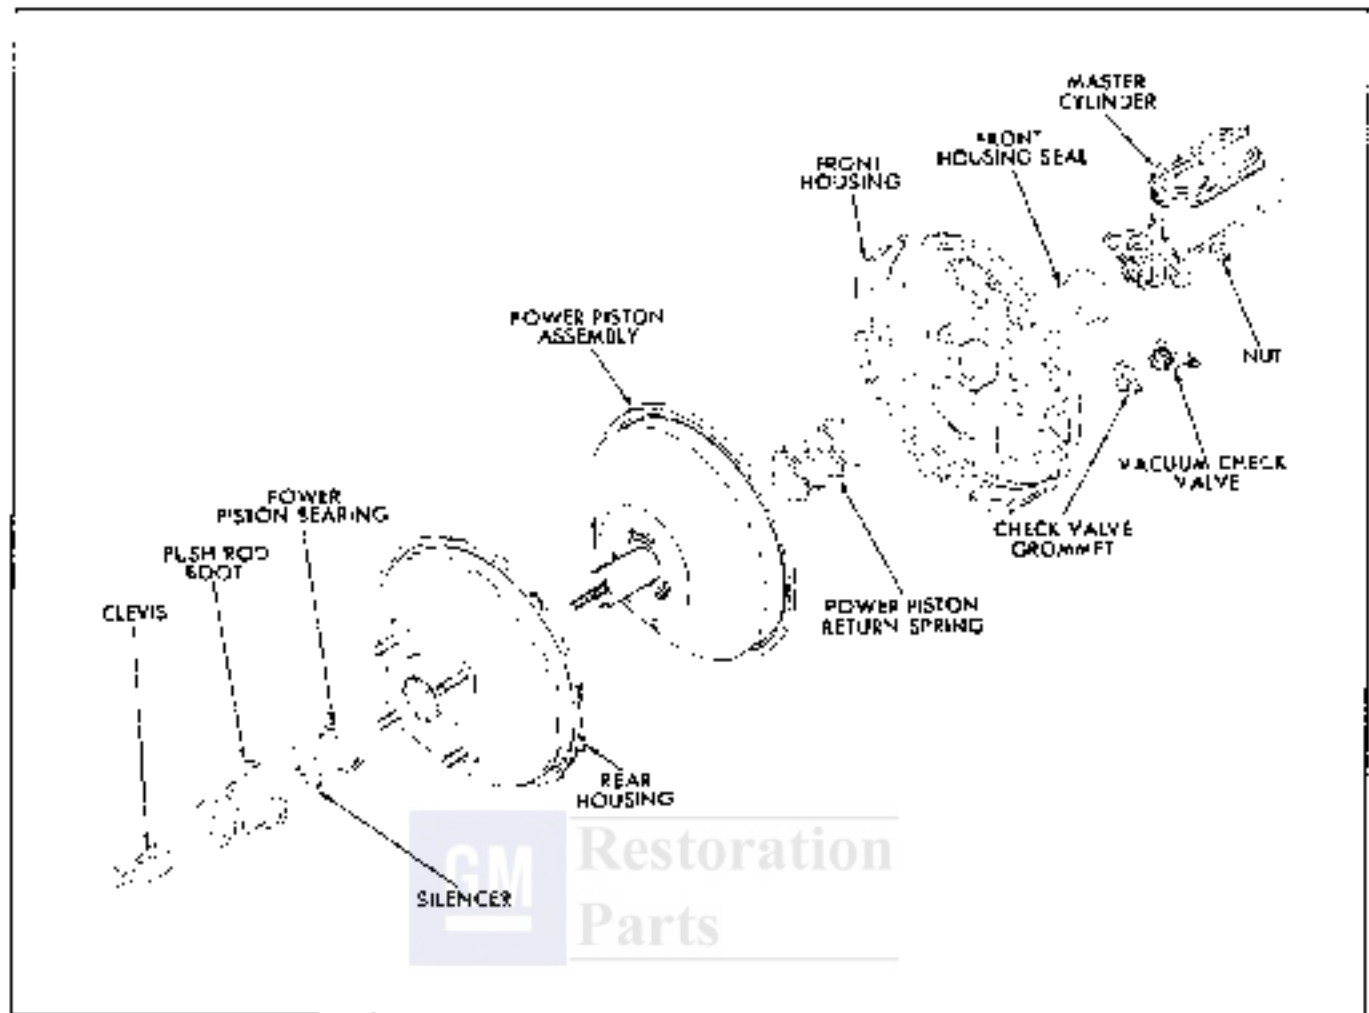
A-6 Exploded View of Pontiac Power Brake Unit
